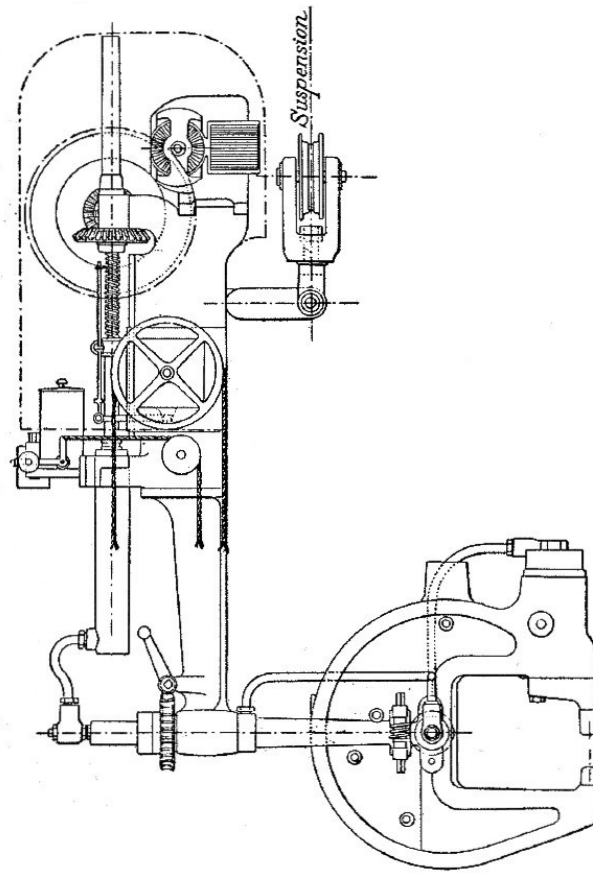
Portable version of Delaloë's hybrid riveting machine called "electric riveter", that is, a portable hydraulic riveting machine supplied by an electric motor (Maugas 1900, 170–71)
